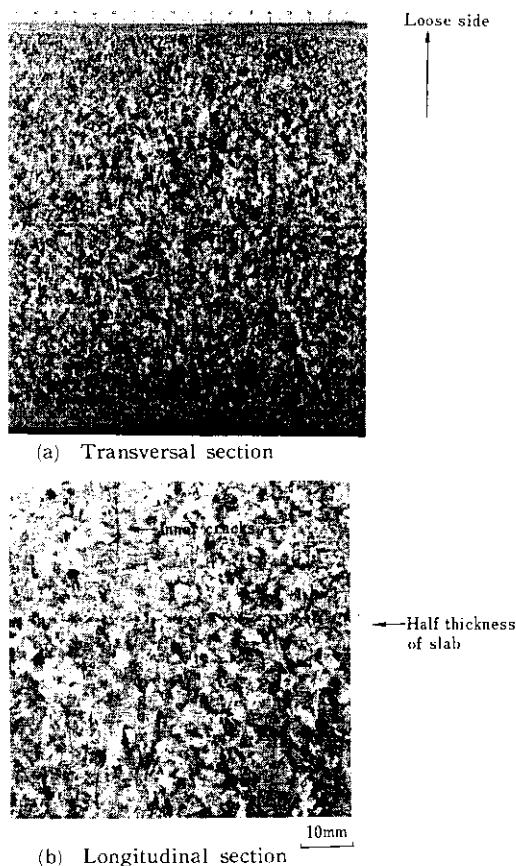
The typical cast structures including cracks along the central zone of A slab
